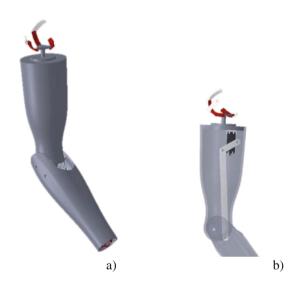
Prosthetic arm (a) CAD model; (b) View of the mechanism actuating the elbow
